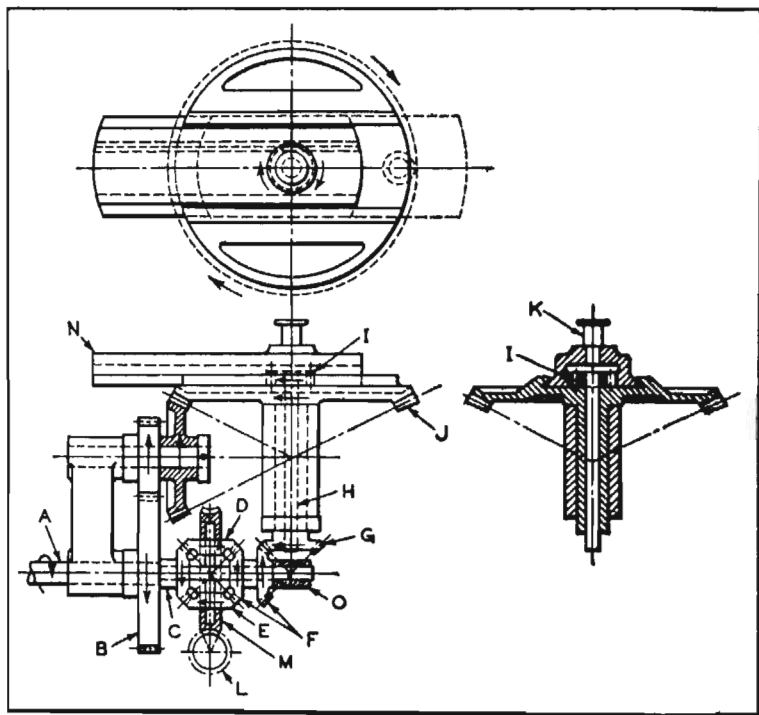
Mechanism for Driving Crankpin *K* from Shaft *A*, which Enables Throw or Distance of Crankpin from Center of Its Shaft to Be Adjusted While Mechanism is in Operation.
